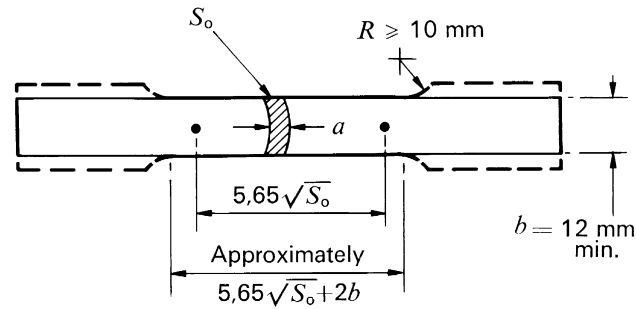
Test specimen dimensions for pipes and tubes - I
